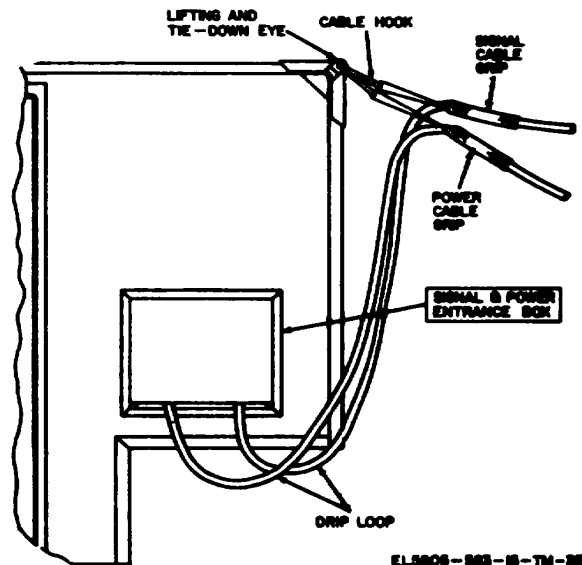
Cables grip and cable hook installation diagram.
